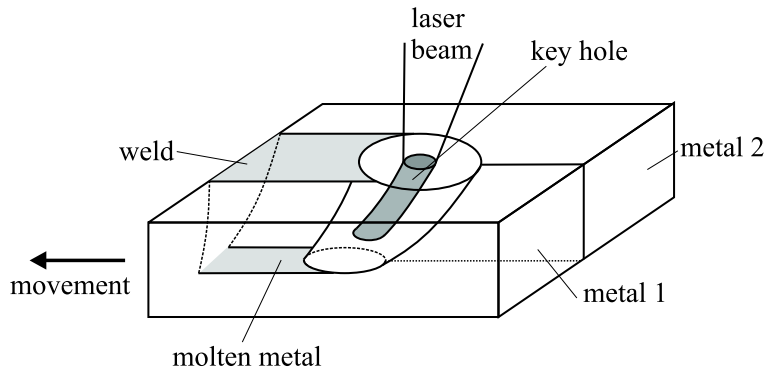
Formation of a 'keyhole' during high power laser beam welding.
